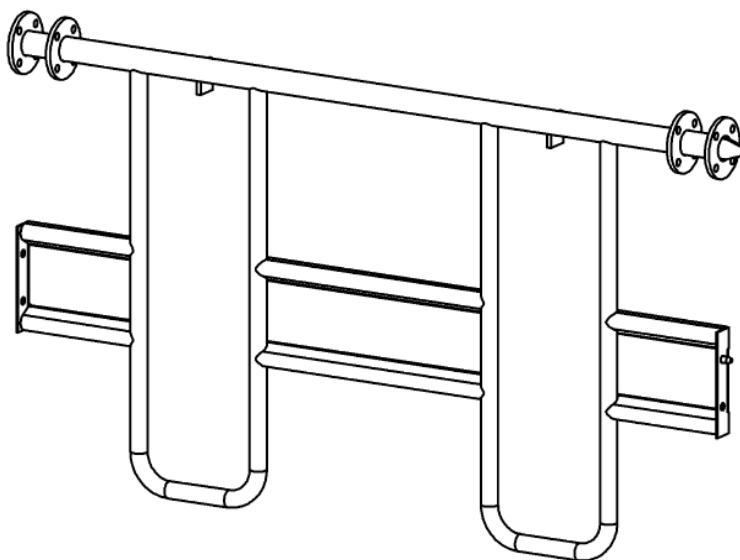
Rockstarter Mounting Bar Kit – PN: 177191
